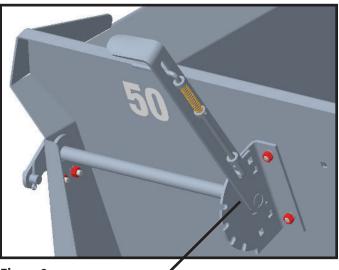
SLIDE NOTCHED PLATE (PLATE WITH 5 NOTCHES) BETWEEN MOUNTING BRACKET AND LEVER.
